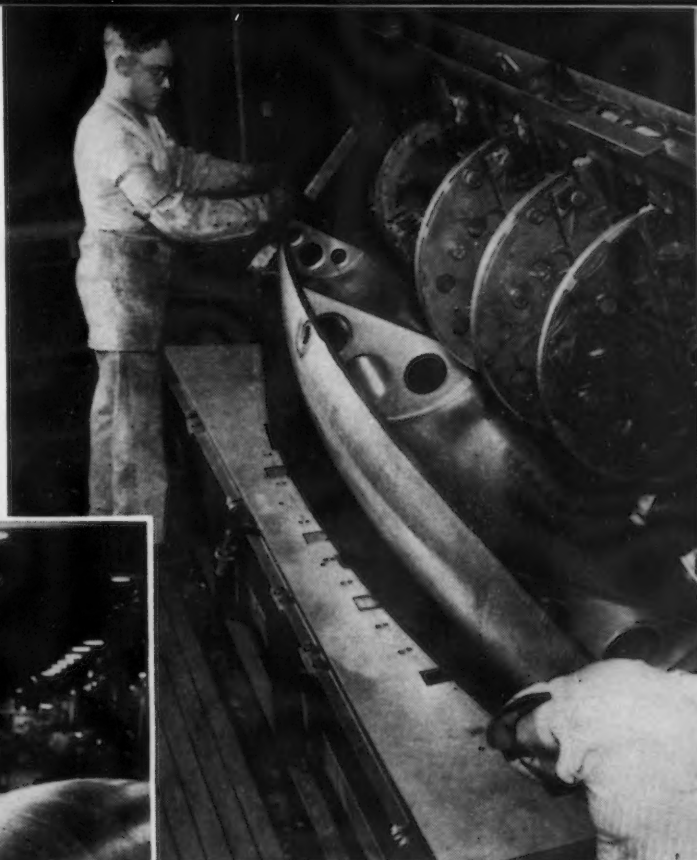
Seam welding adapter assembly of the filler well to the left hand shell. The weld is made on a double contoured surface having a rise of  $\frac{3}{4}$  in. in 90 deg. of rotation, by a special series welder. When the two welding wheels contact the skin of the tank and the adapter assembly, the welding circuit is closed by the circular copper alloy short circuiting bar which is horizontal and can be seen in the photograph just below the skin. Since the welding current flows through the sheets at two points, two welds are made simultaneously and the 360 deg. of welding is completed in 185 deg. actual rotation of the upper heads.
